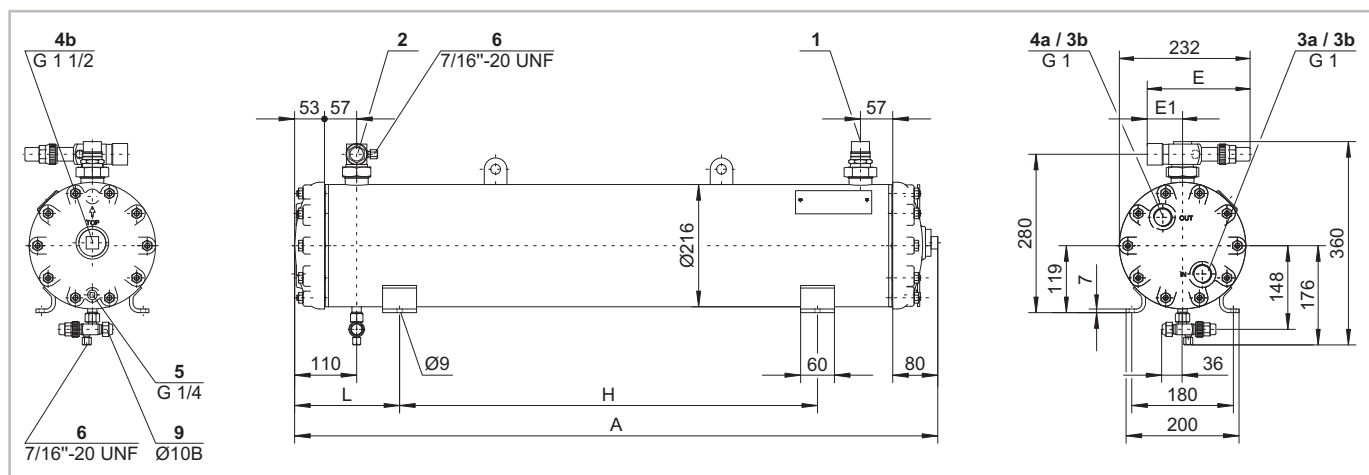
Dimensional drawings oil coolers OW781, OW941
